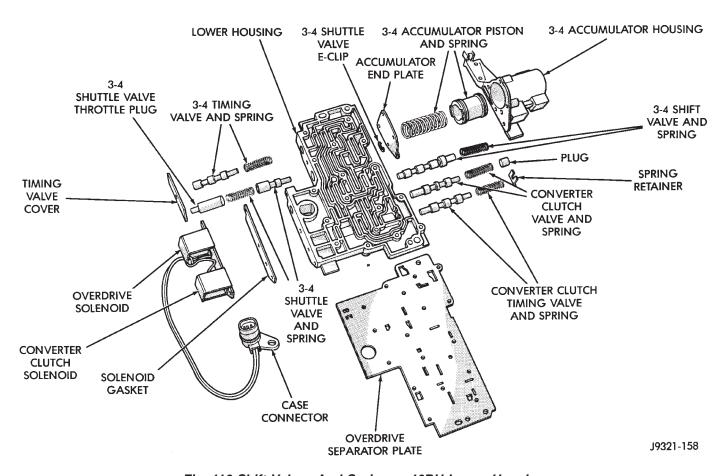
Shift Valves And Springs—46RH Lower Housing
